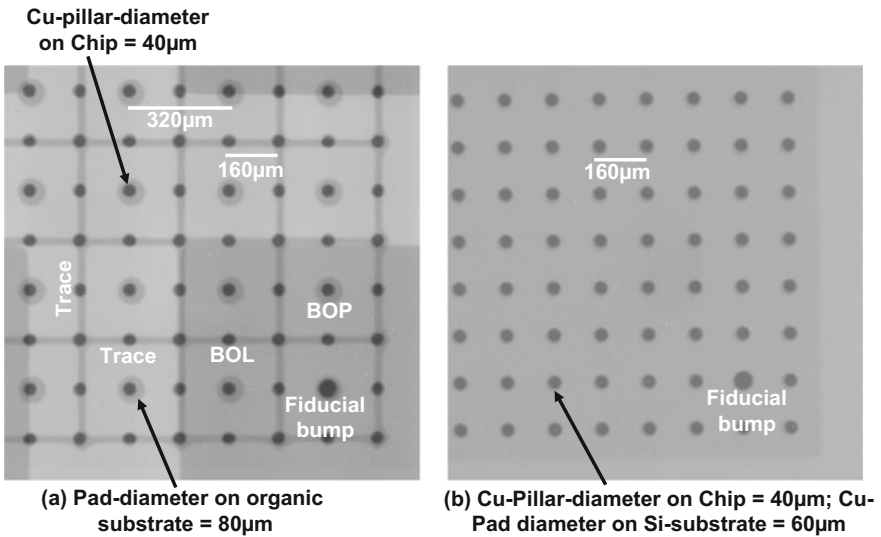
X-ray images. a Flip chip assembly on organic substrate that includes BOLs and BOPs. b Flip chip assembly on Si substrate
